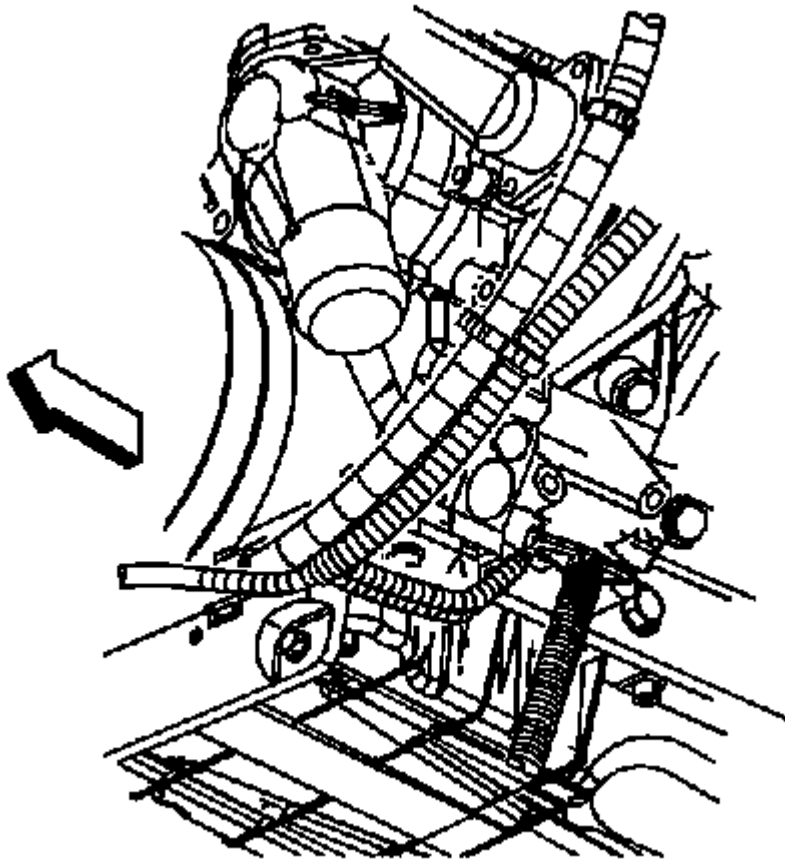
View Of Ground Wire Bolt Bosses (Left Side)
